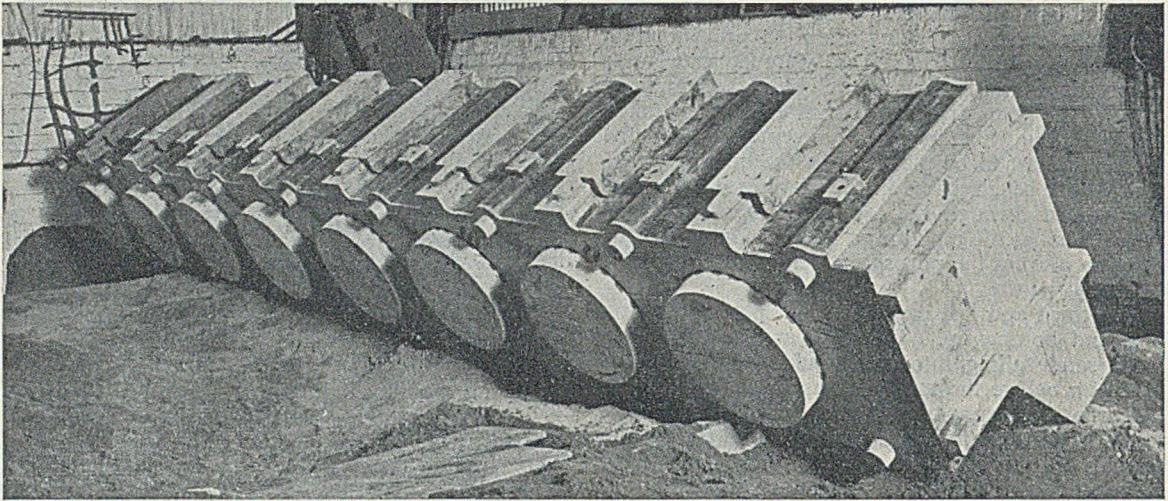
Pattern for the Eight-cylinder Block Casting of the Mirrlees "K" Diesel Engine, as modified at the Author's Foundry.
